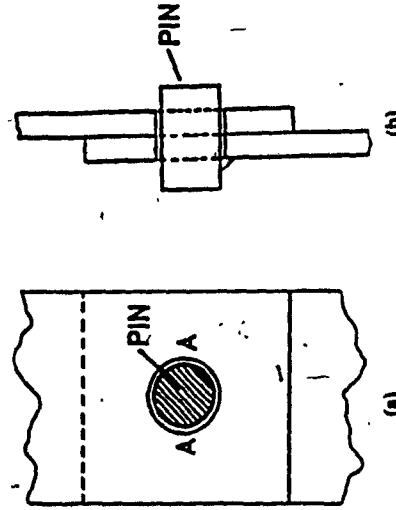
(a) Front elevation of single pinned joint; (b) Side elevation of single pinned joint.
